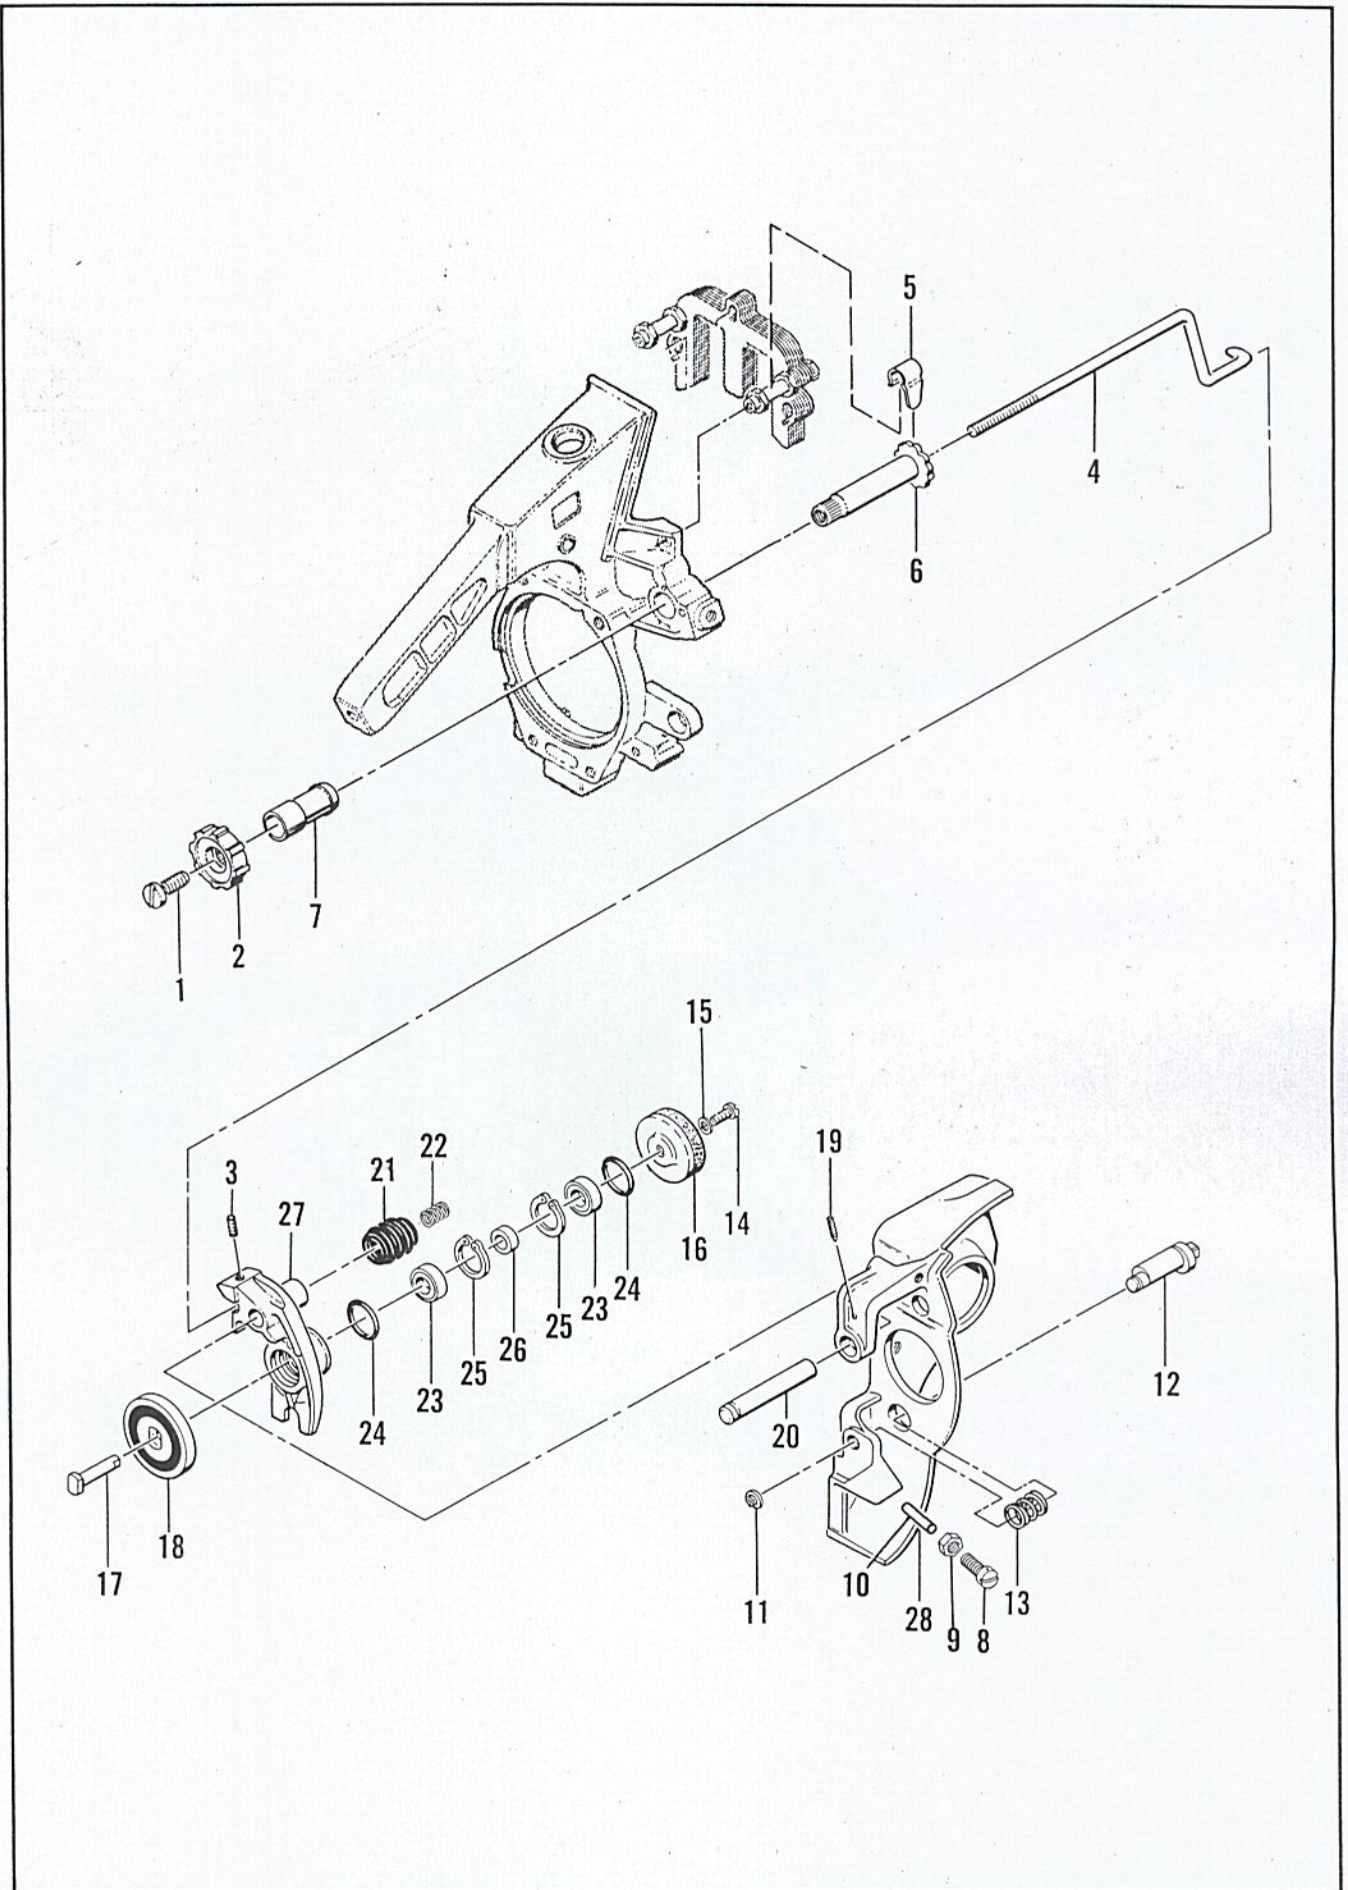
A. Chain Grinder Assembly, BP-1 Engine
